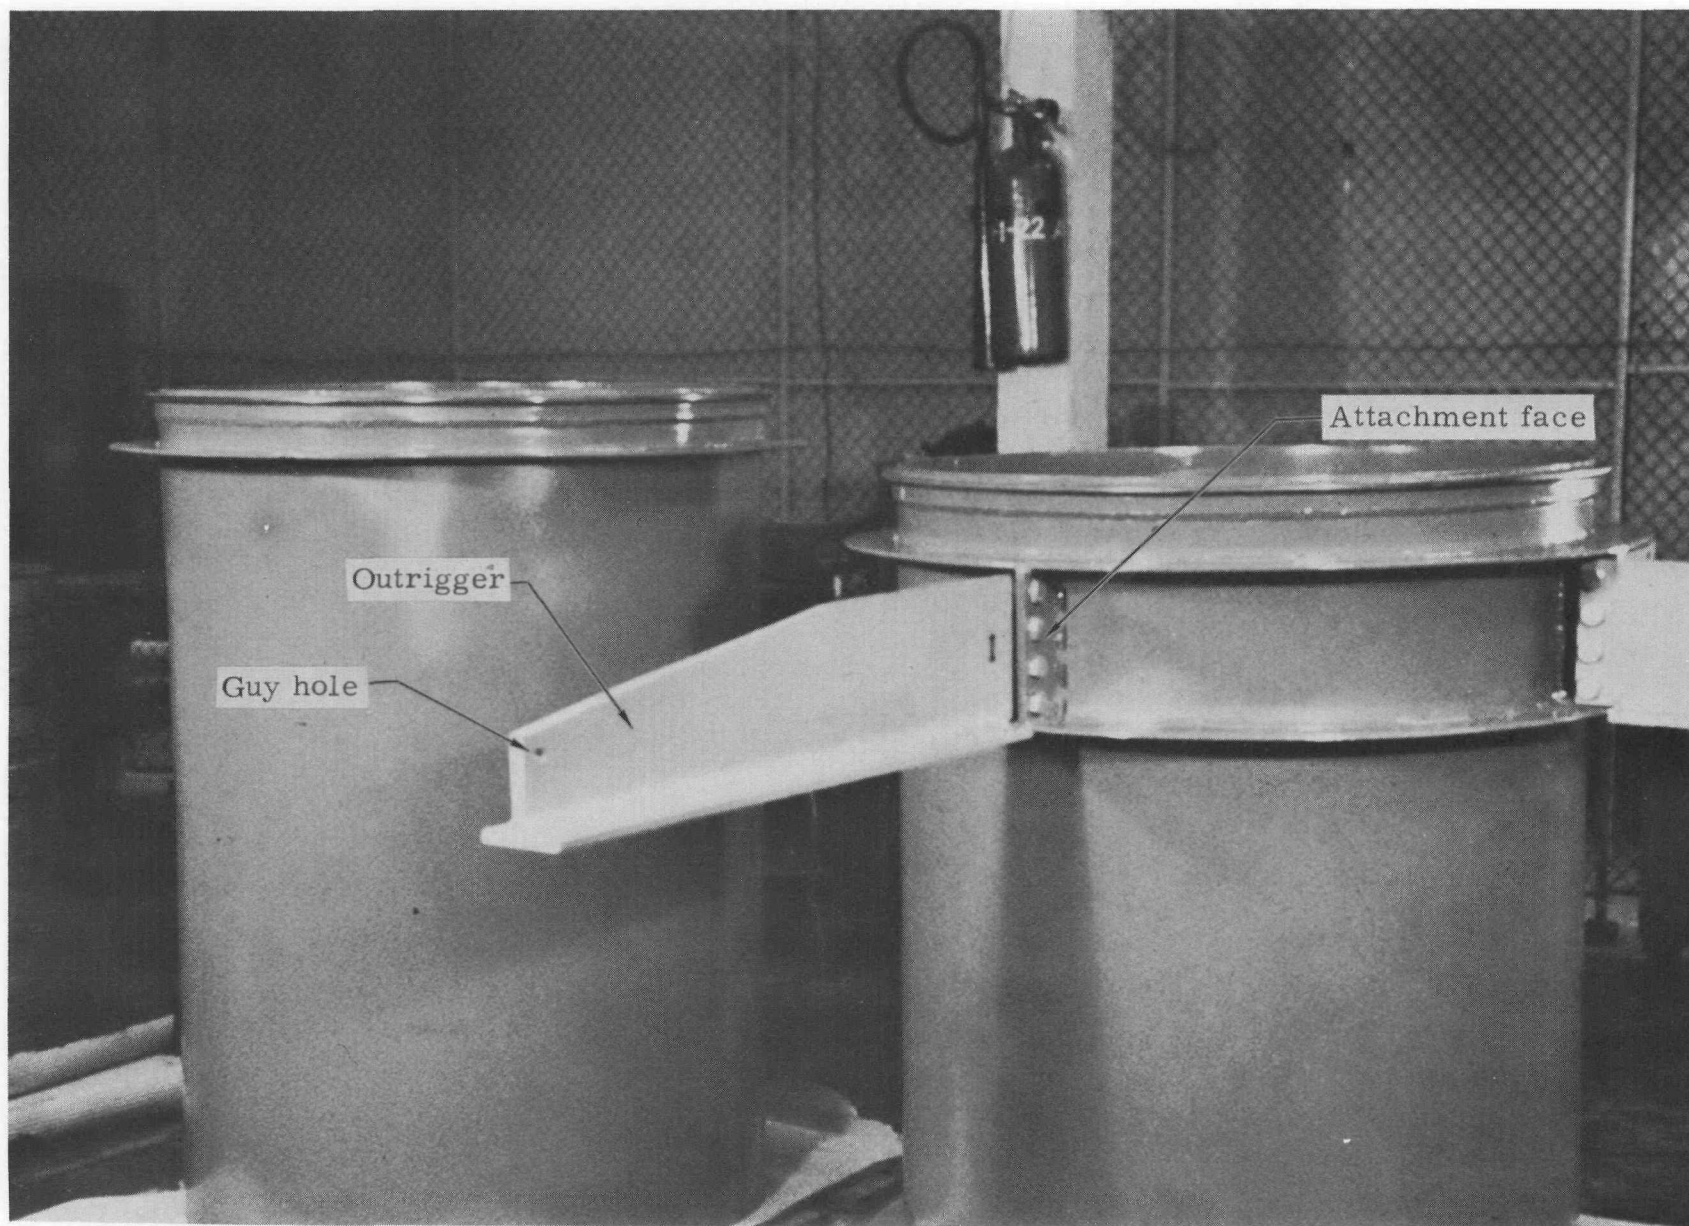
Outrigger Bolted to Attachment Face of Field Installation Tube
